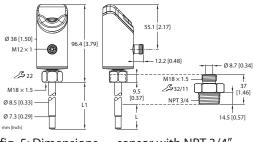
Dimensions — sensor with NPT 3/4" screw-in adapter
